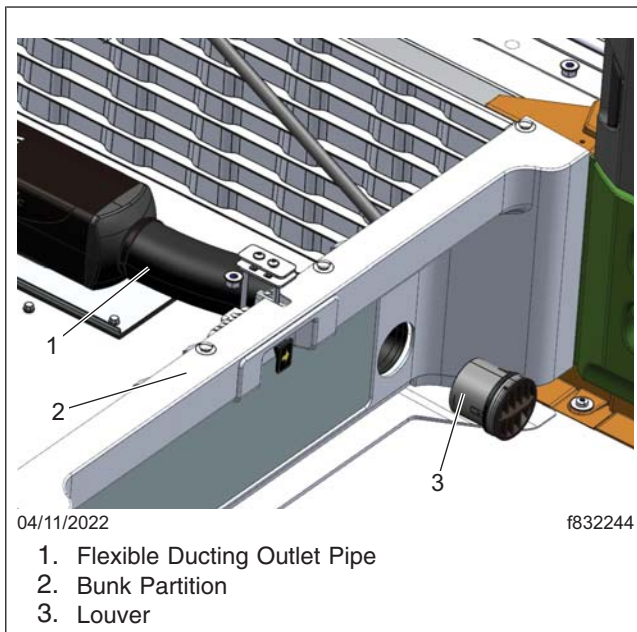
, Location of the Flexible Ducting Outlet Pipe and Louver
